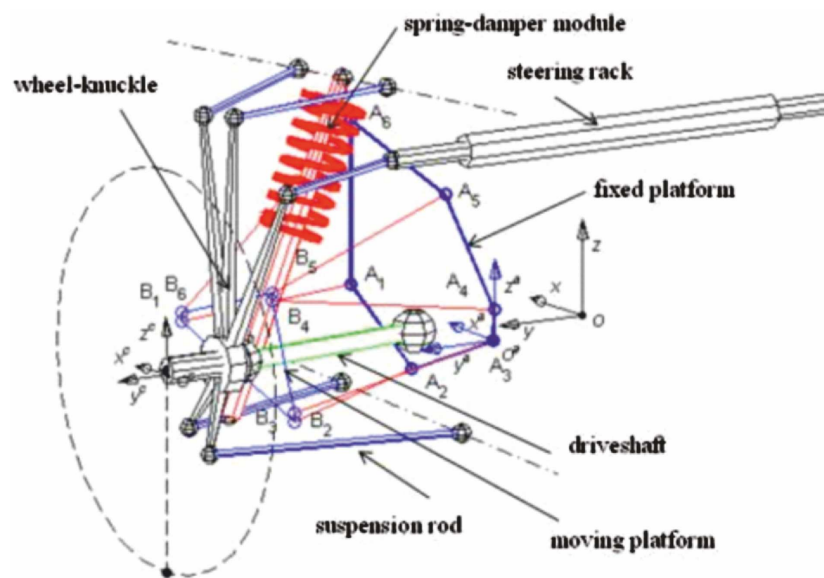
Perspective view of: (i) 5-link suspension mechanism for guiding a front, driven wheel of VW Passat B6 and (ii) wire-base platform mechanism installed between the wheel knuckle and car chassis
